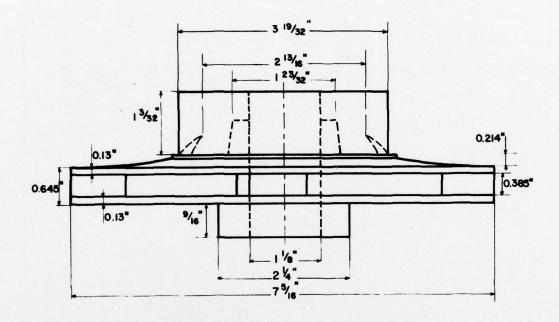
BRONZE-IMPELLER DESIGN
